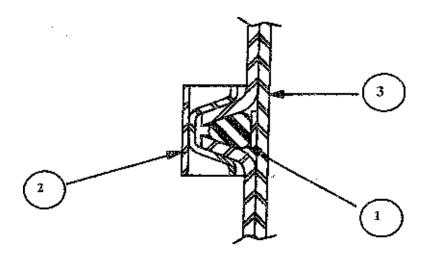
V-Band Clamp and Vacuum Chamber Mounting Detail
